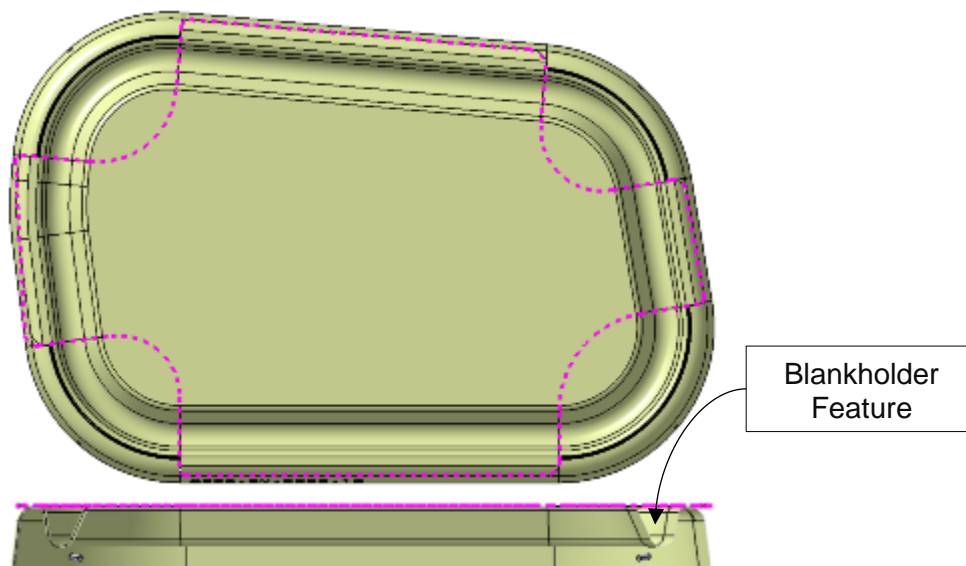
Concept-9 stage 1 tool and blank – top and side views
